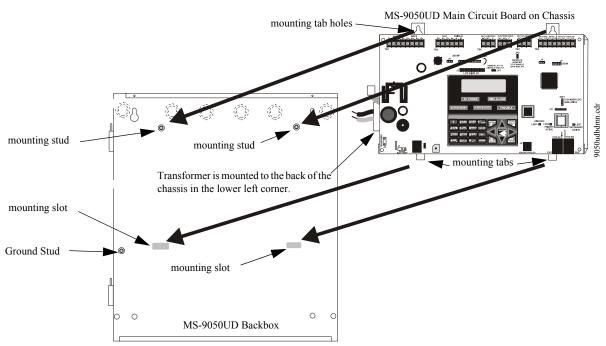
MS-9050UD Main Circuit Board/Chassis Installation
